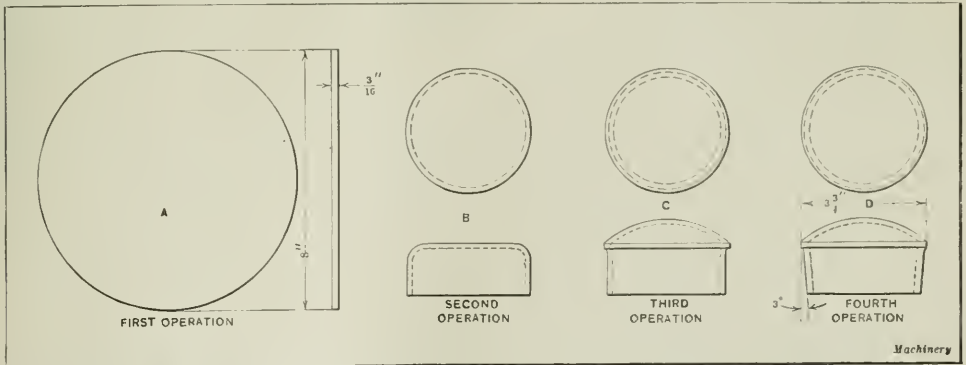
Steps in the Production of Hand-hole Plugs for Boilers or Petroleum Stills
